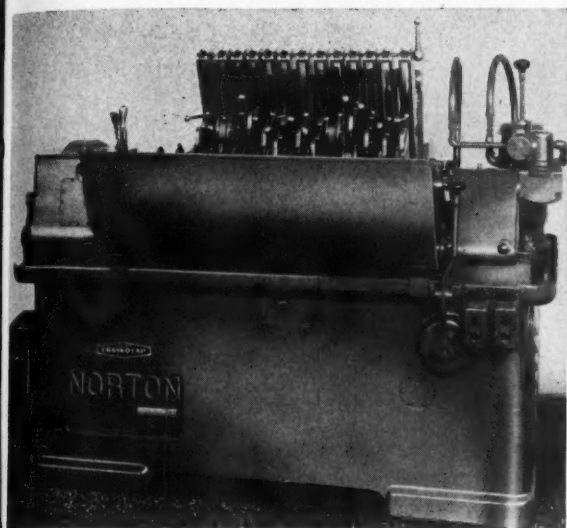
No. 30 Crank-O-Lap. Front view with splash guard in position.
